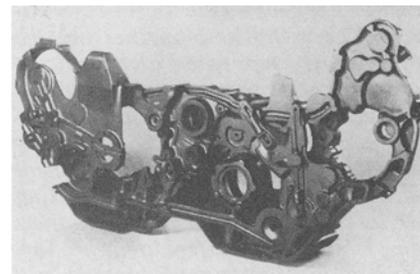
Shown is a sectioned gear casting, revealing cored passageways.
